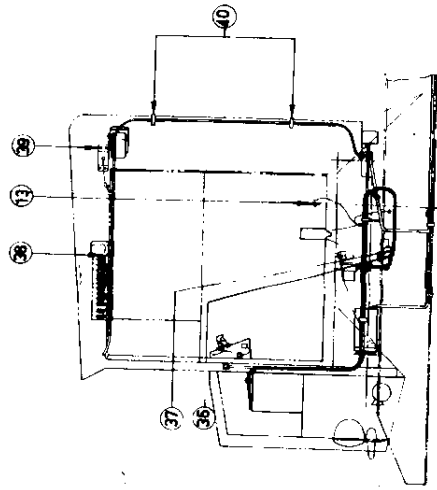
WIRING LAYOUT DIAGRAM (CAB SIDE VIEW)
